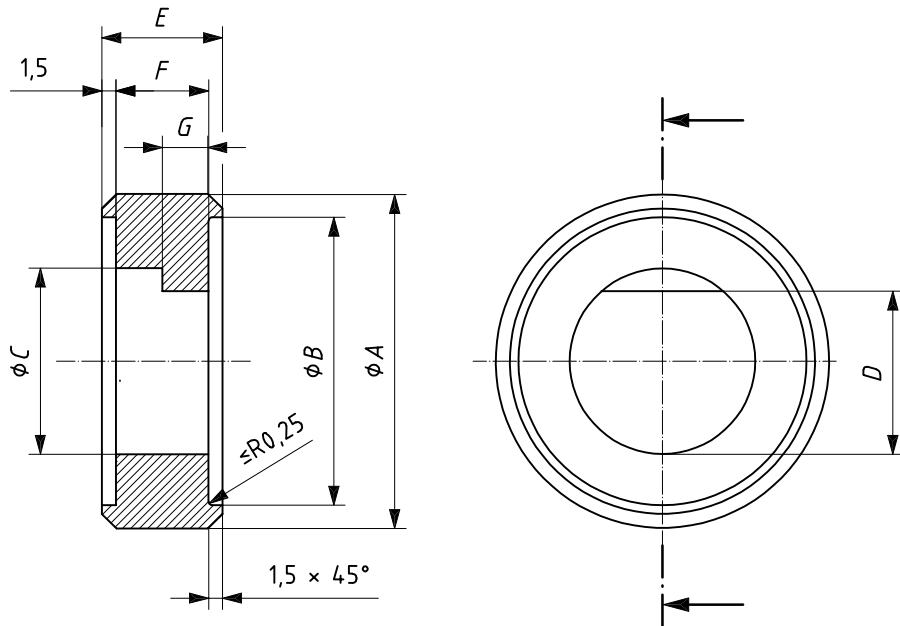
Swirl generator of a threaded type disturbance generator with dimensions as set out in Table B.3
